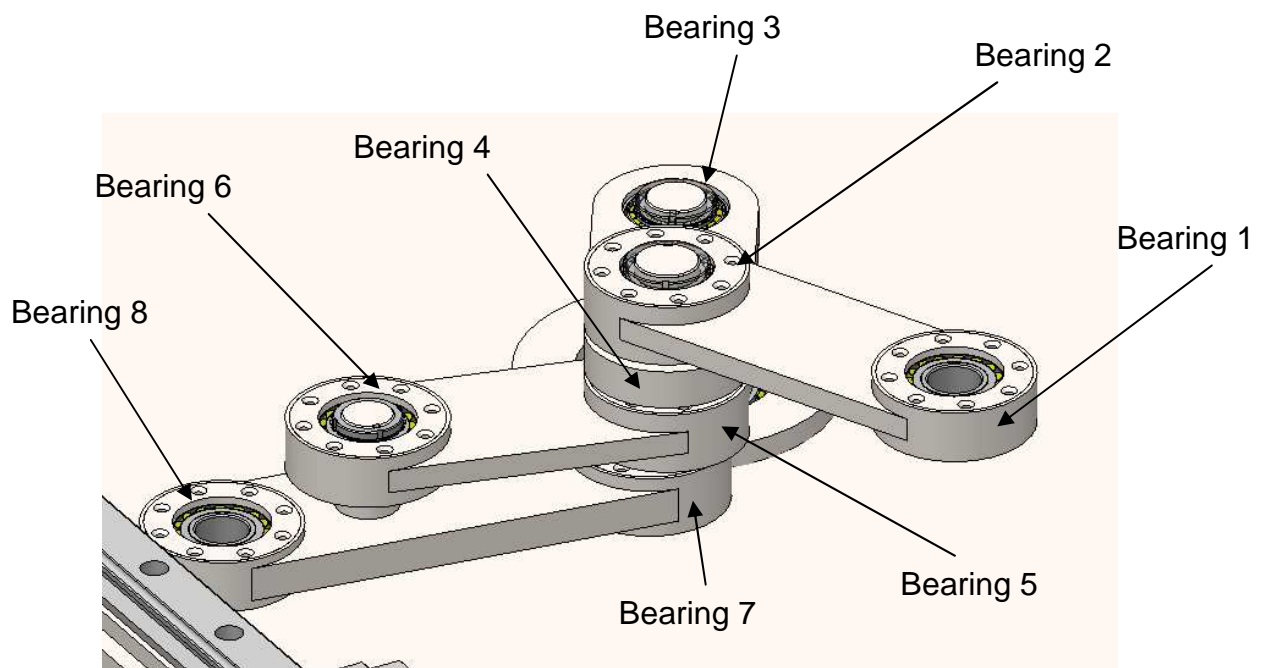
Variable stroke mechanism arrangement proposed for Giant Blade indicating bearing locations (bearing stack consists of bearings 2, 4 and 5)
